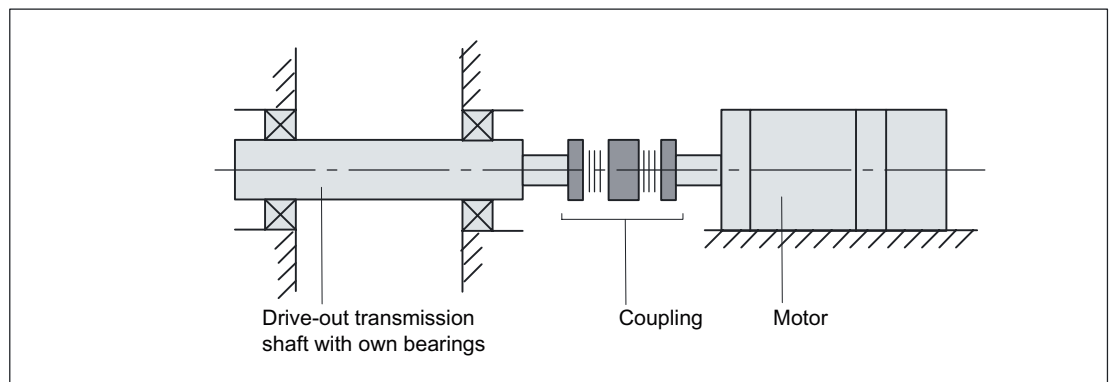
Mechanical output transmission shaft with its own bearings and compensating coupling
